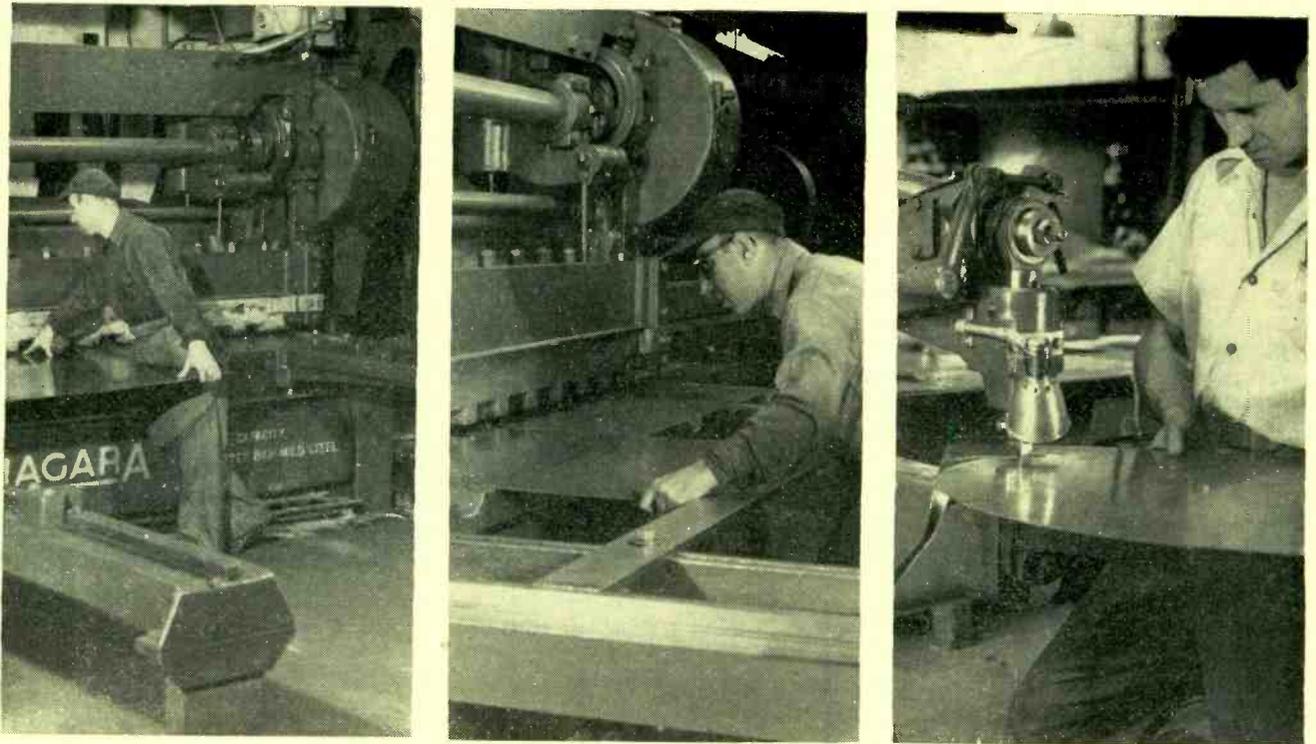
Sheet-metal shearing. Operations shown are conventional shearing (left), front shearing (center) and use of circle shears (right)
